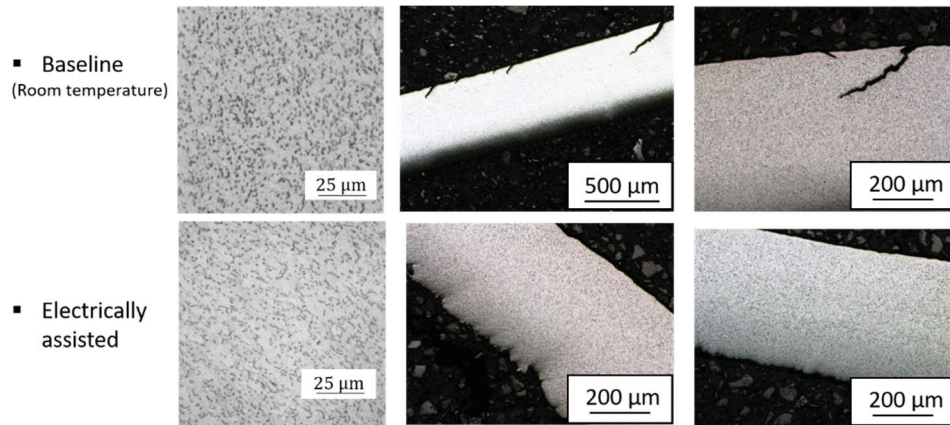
Microscopic images of surfaces on ADSIF formed Ti6Al4V parts
